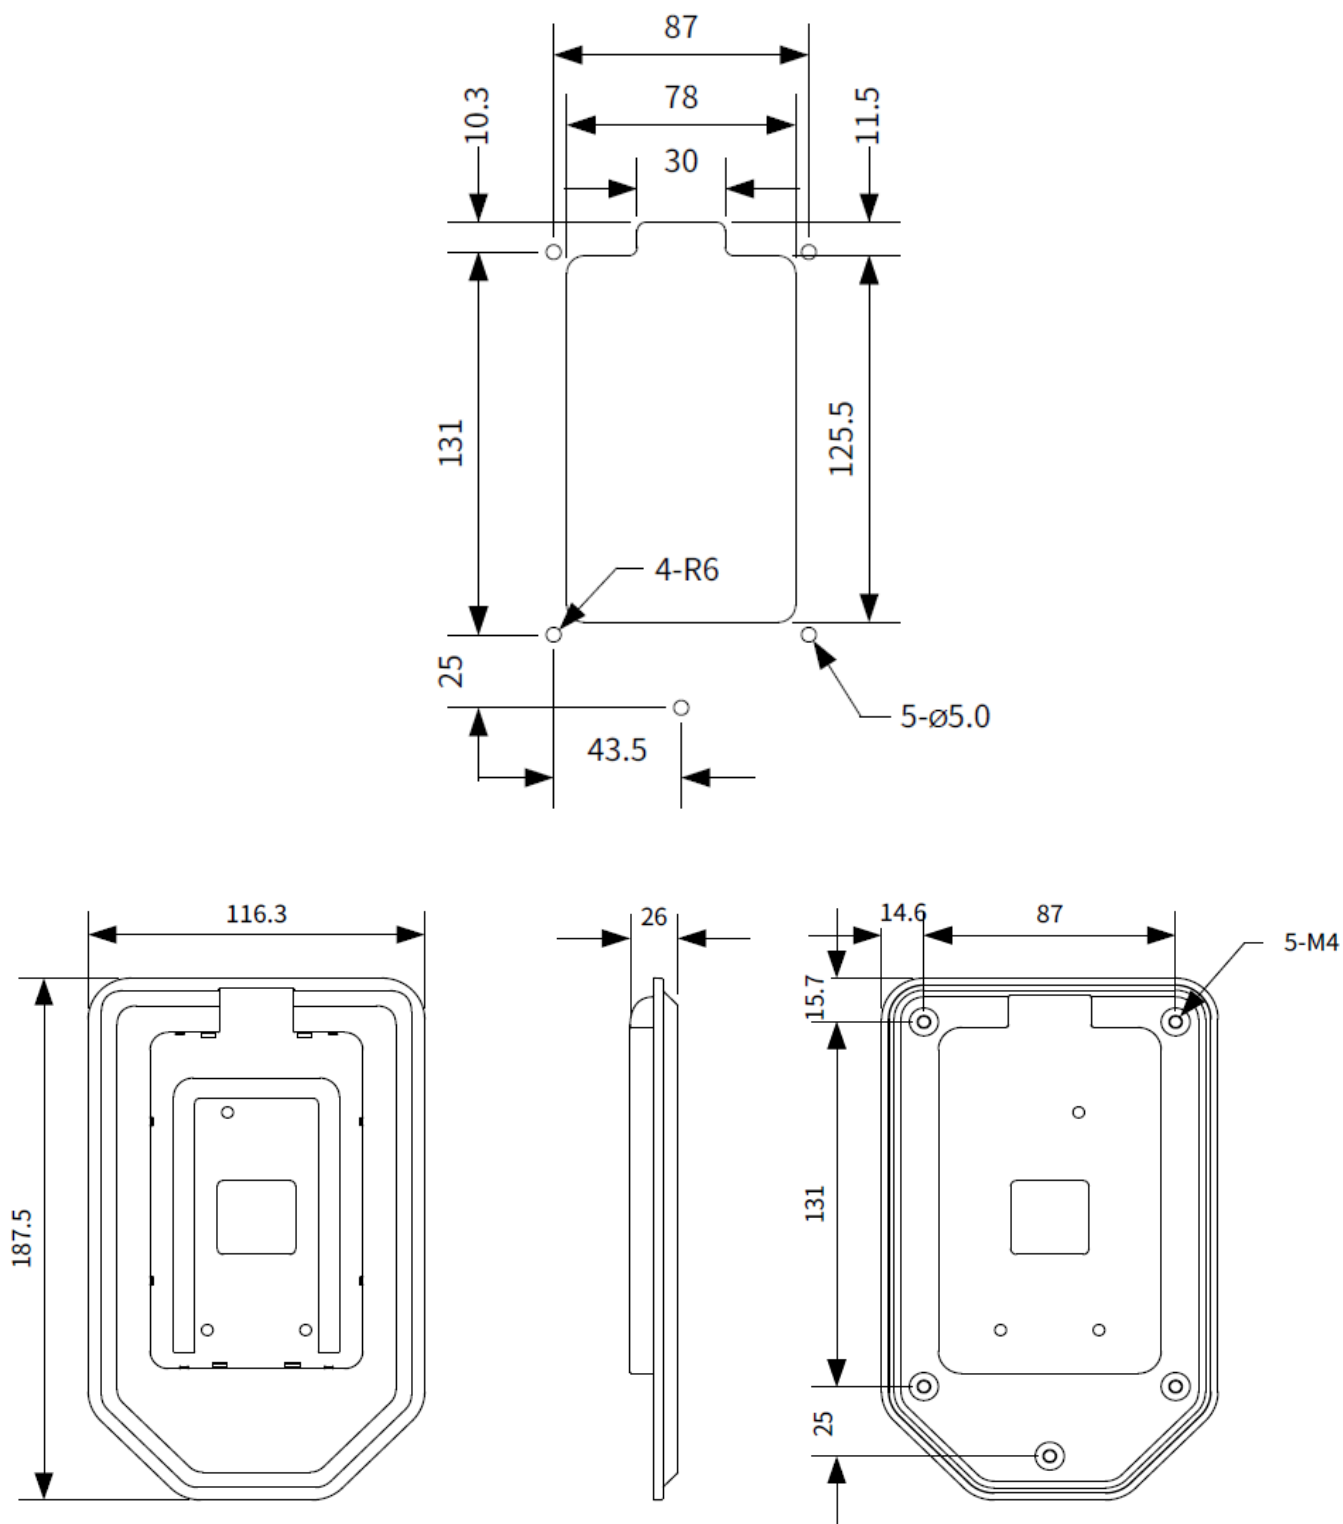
External installation dimensions of 0220-0516 control panel (unit: mm)
